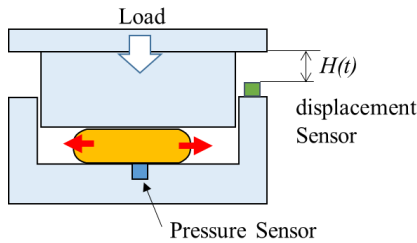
Drawing showing the molded product of the press molding experiment and the measurement position of the pressure sensor
